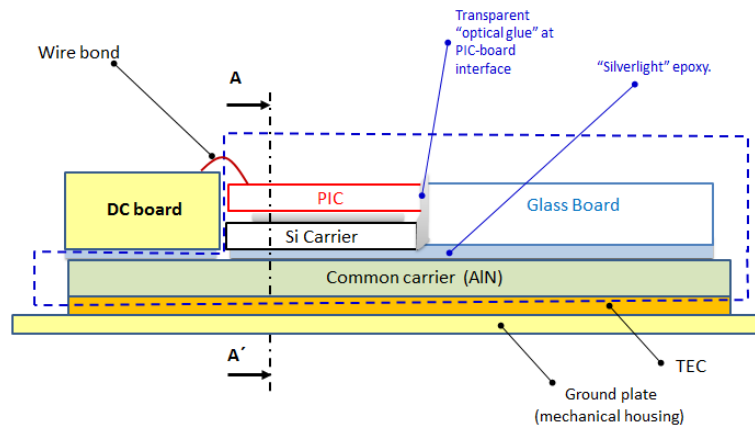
Schematic cross-section view of the final assembly: Modulator PIC mounted on Si carrier, edge coupled to the glass board and finally mounted on a common carrier which supports DC and RF (not shown) planar connection boards (PCBs).
